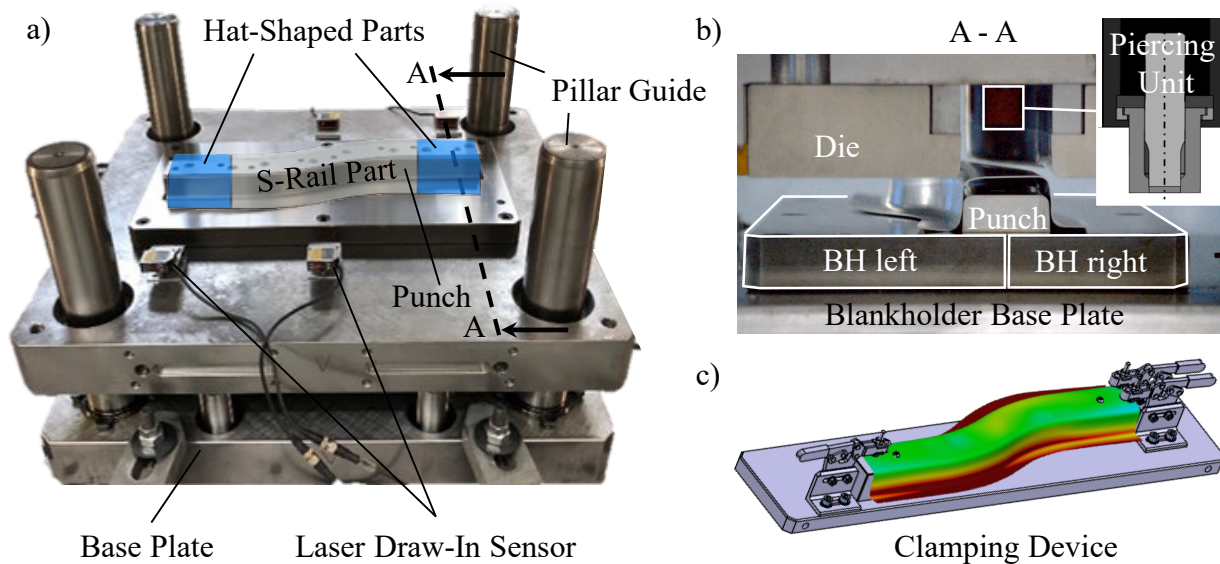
Experimental setup for multistage deep-drawing with alternating blank draw-in.
